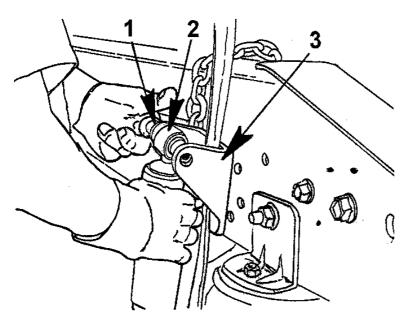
Upper Shock Mounting Bolt Removal/ Install
